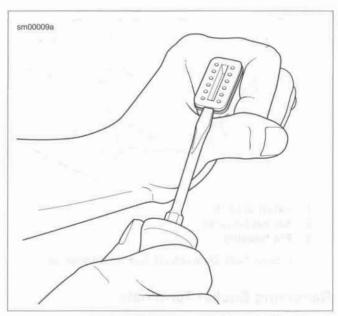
Deutsch DT Sealed Connector: Remove Secondary Locking Wedge
